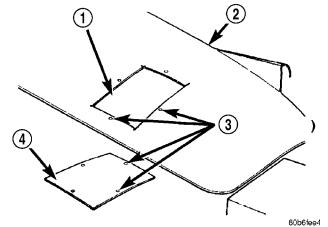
DAMAGED PANEL CUTOUT AND PATCH
